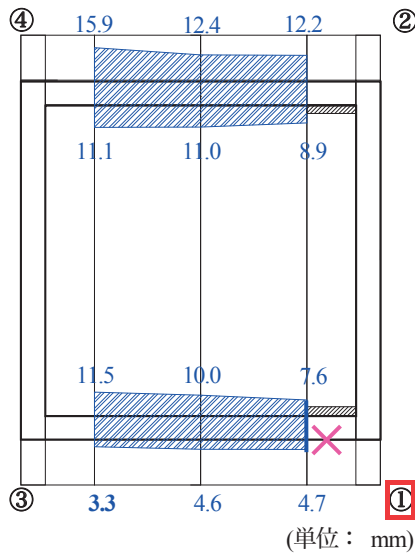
Welding properties of cross joint (S30-0-5-R-VC-MD)
